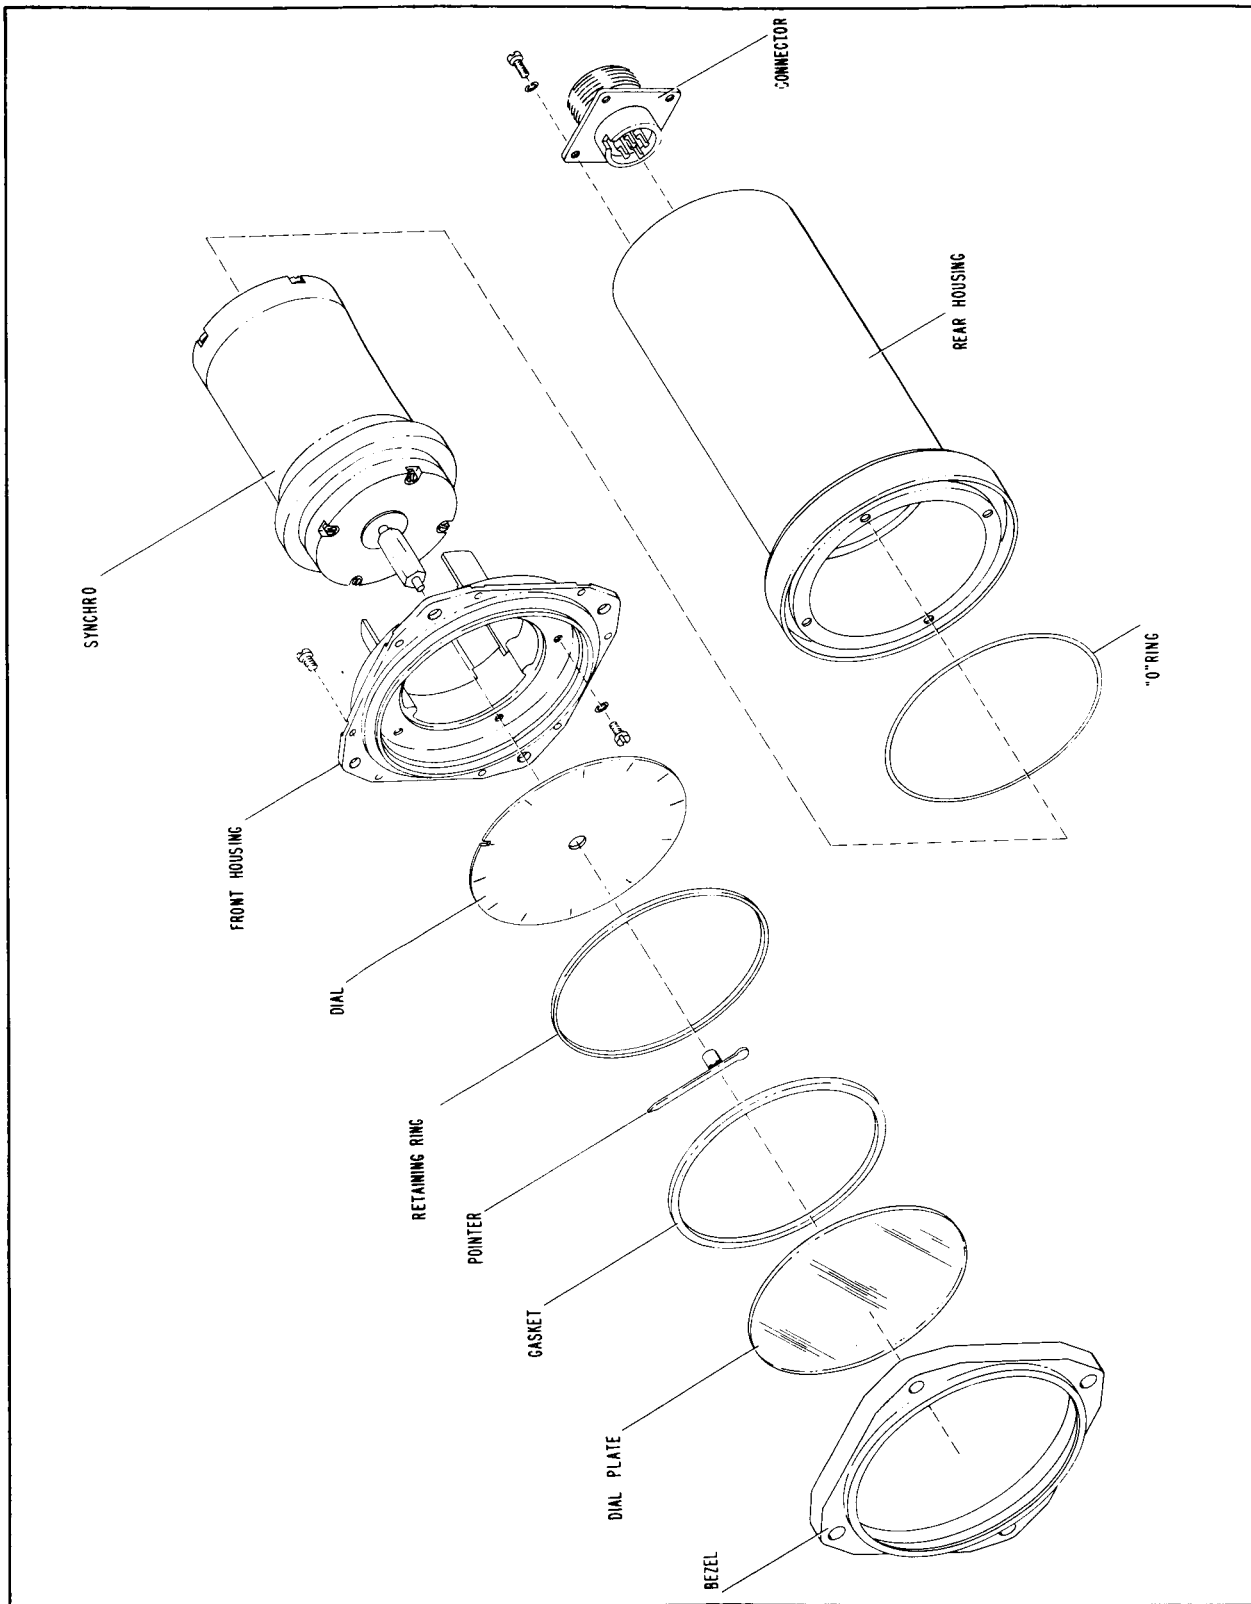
Acquisition Data Console Synchro Receiver, Exploded View
